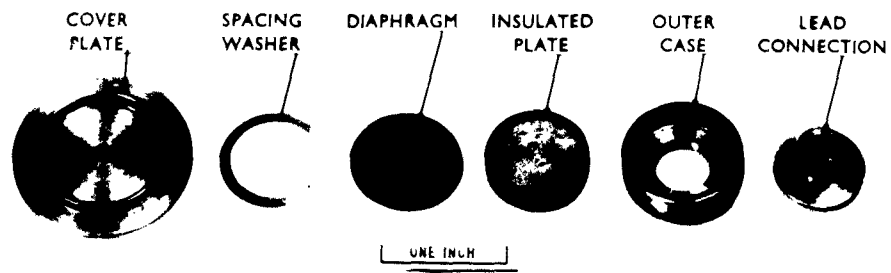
EXPLODED VIEW OF CONDENSER PICK UP
